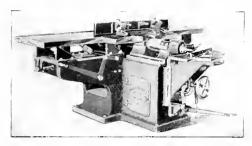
No. 575. Universal Wood Worker with Boring and Mortising Attachments.
